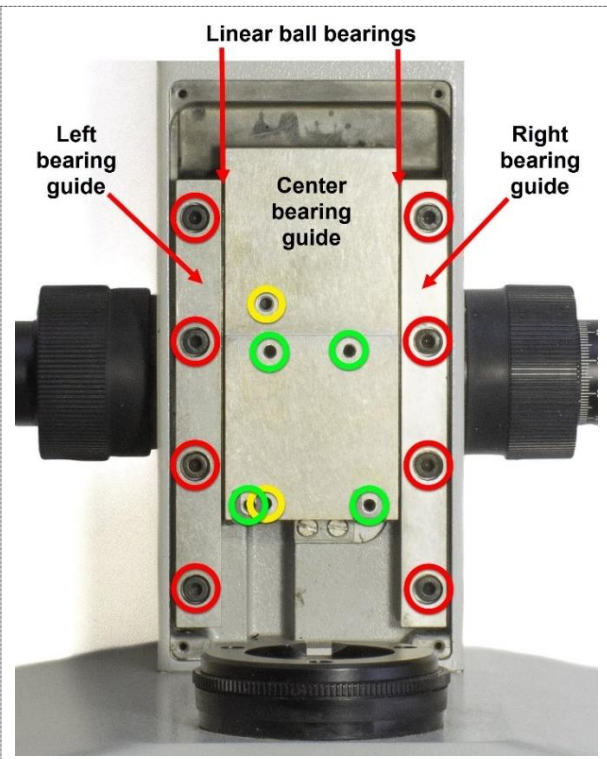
The microscope's focus slide after the stage holder and the focus slide cover have been removed.
